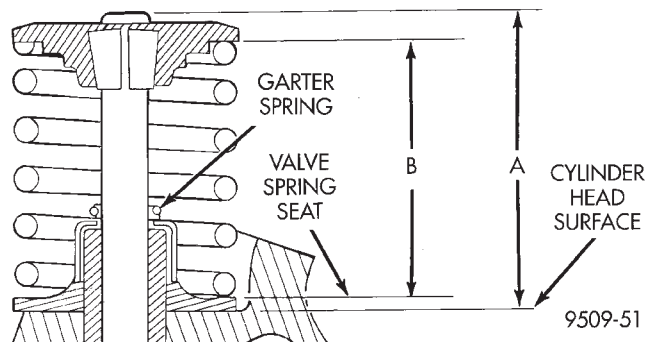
Checking Spring Installed Height and Valve Tip Height Dimensions
